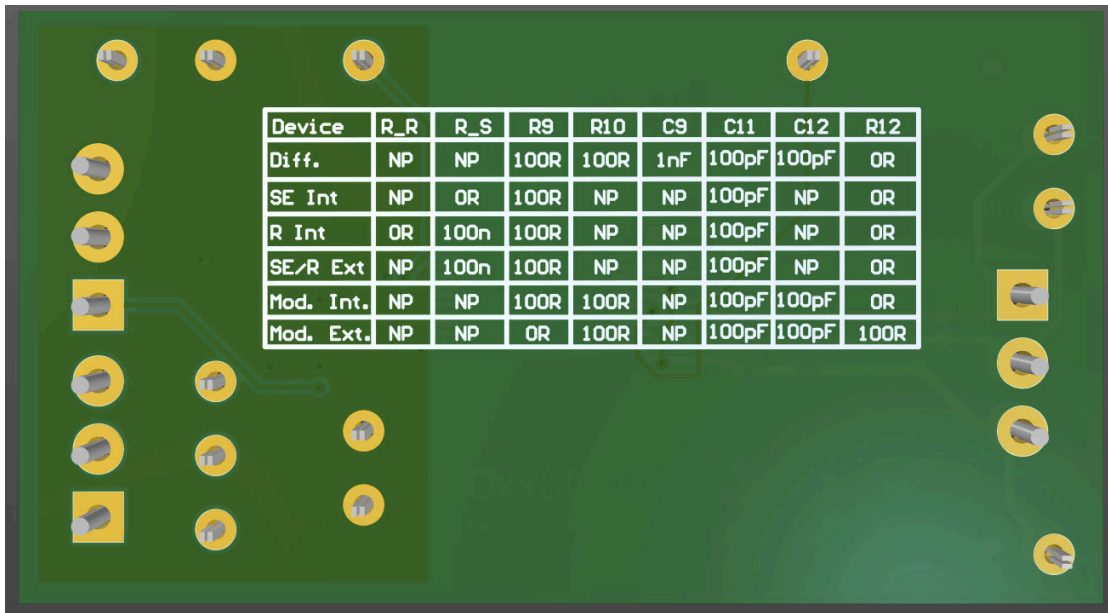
AMC43xxDVVEVM Bottom 3D PCB Drawing
